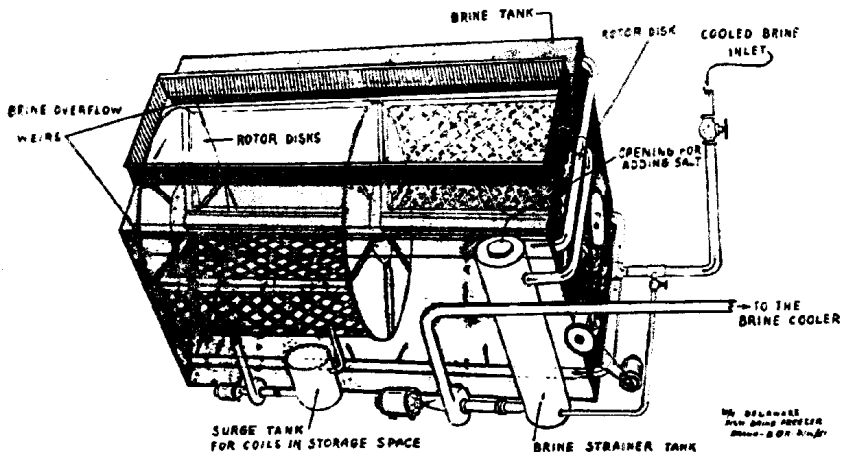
Brine freezer tank showing rotor and brine circulating equipment.
